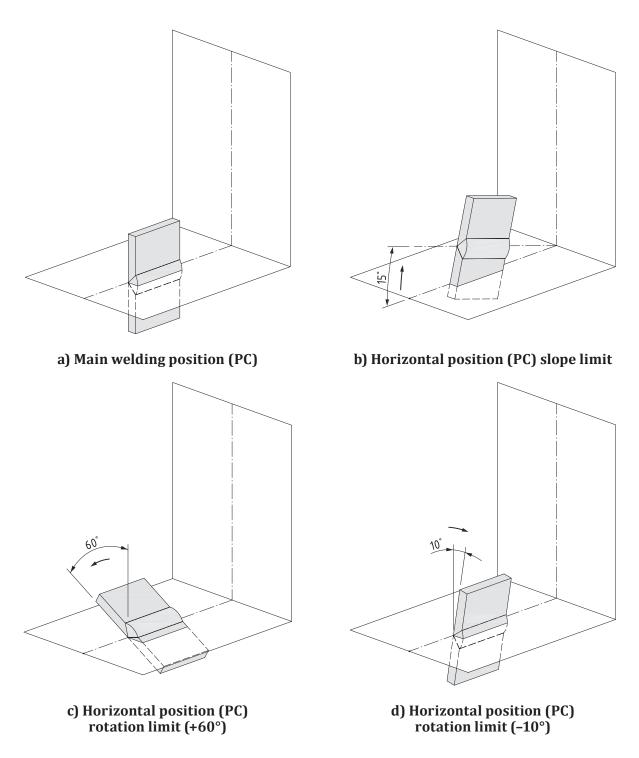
Welding position PC slope and rotation limits for butt welds
